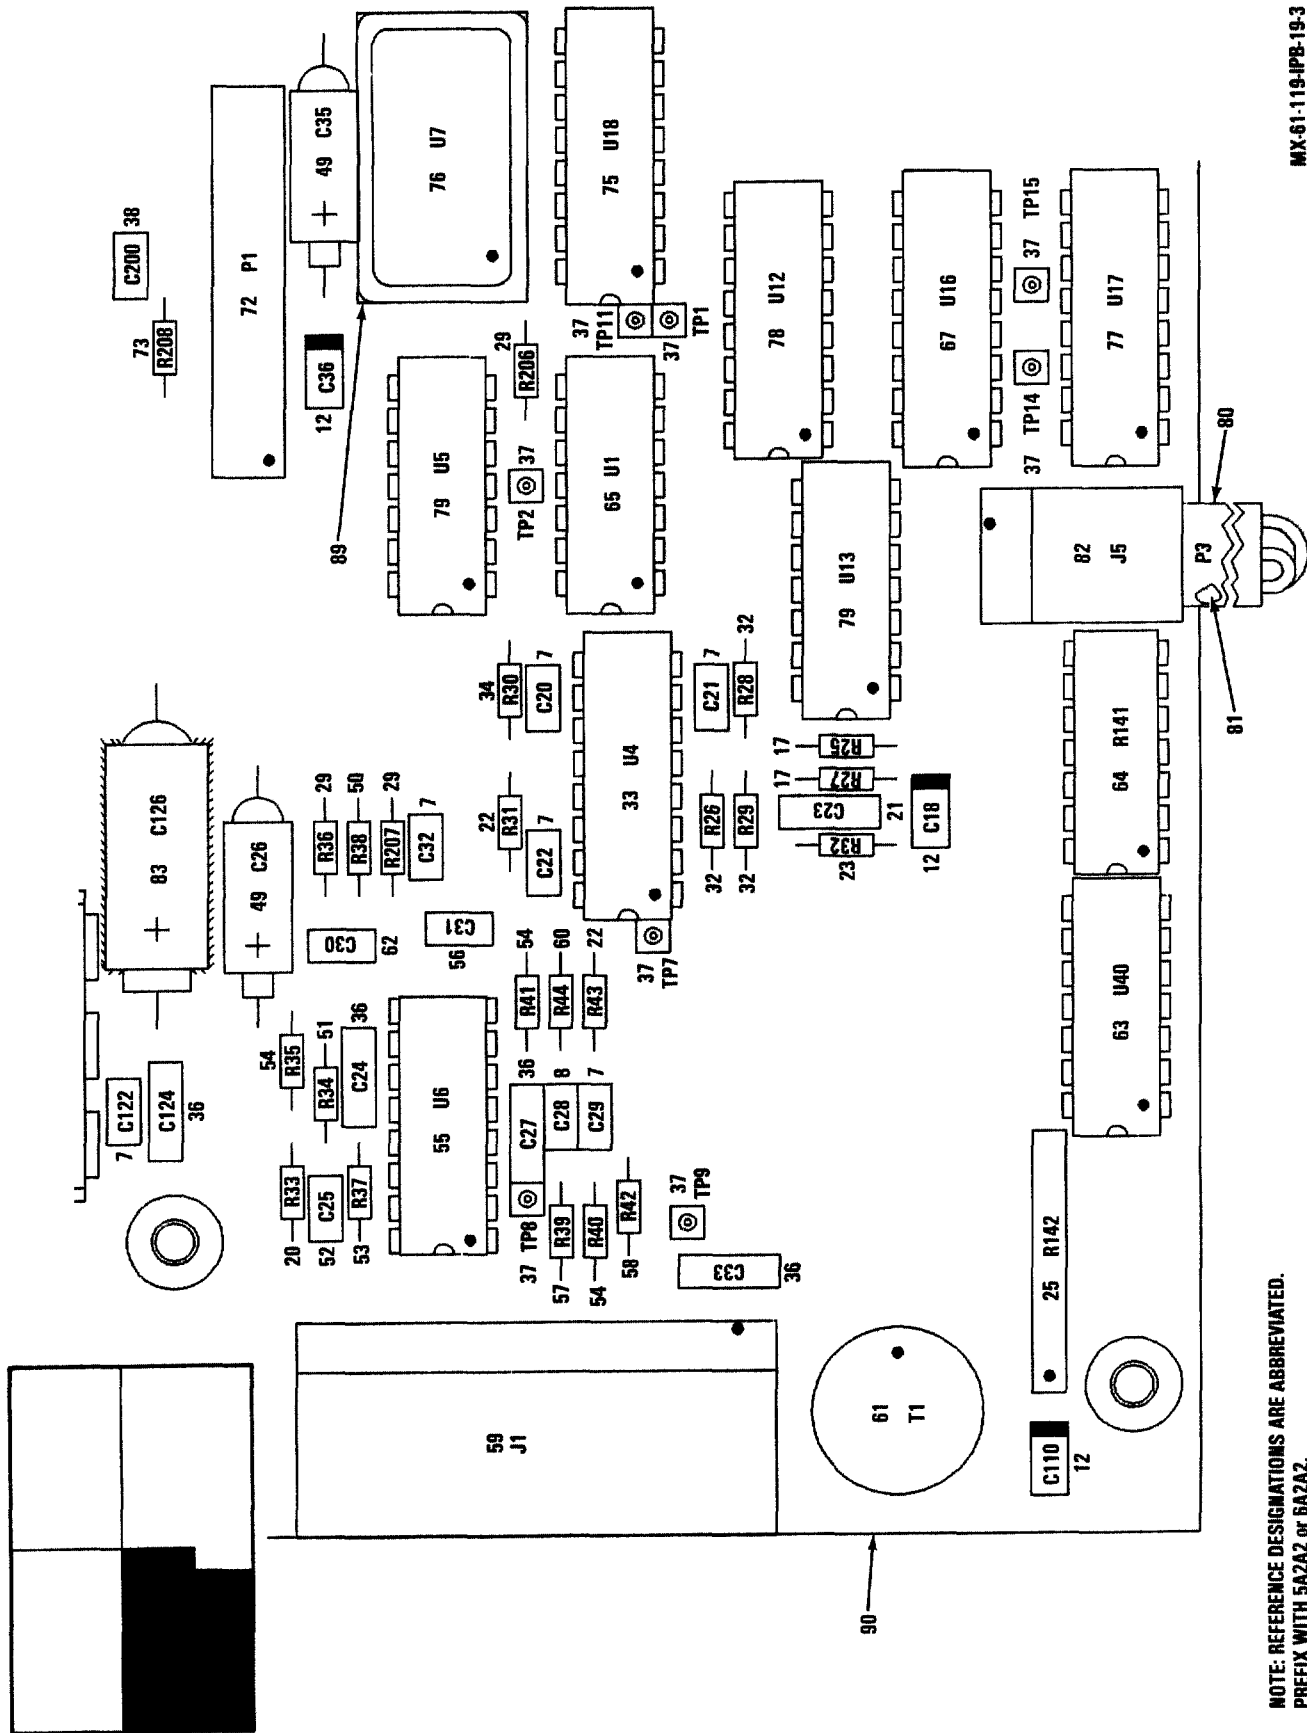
CIRCUIT CARD ASSEMBLY (SHEET 1 OF 4)
